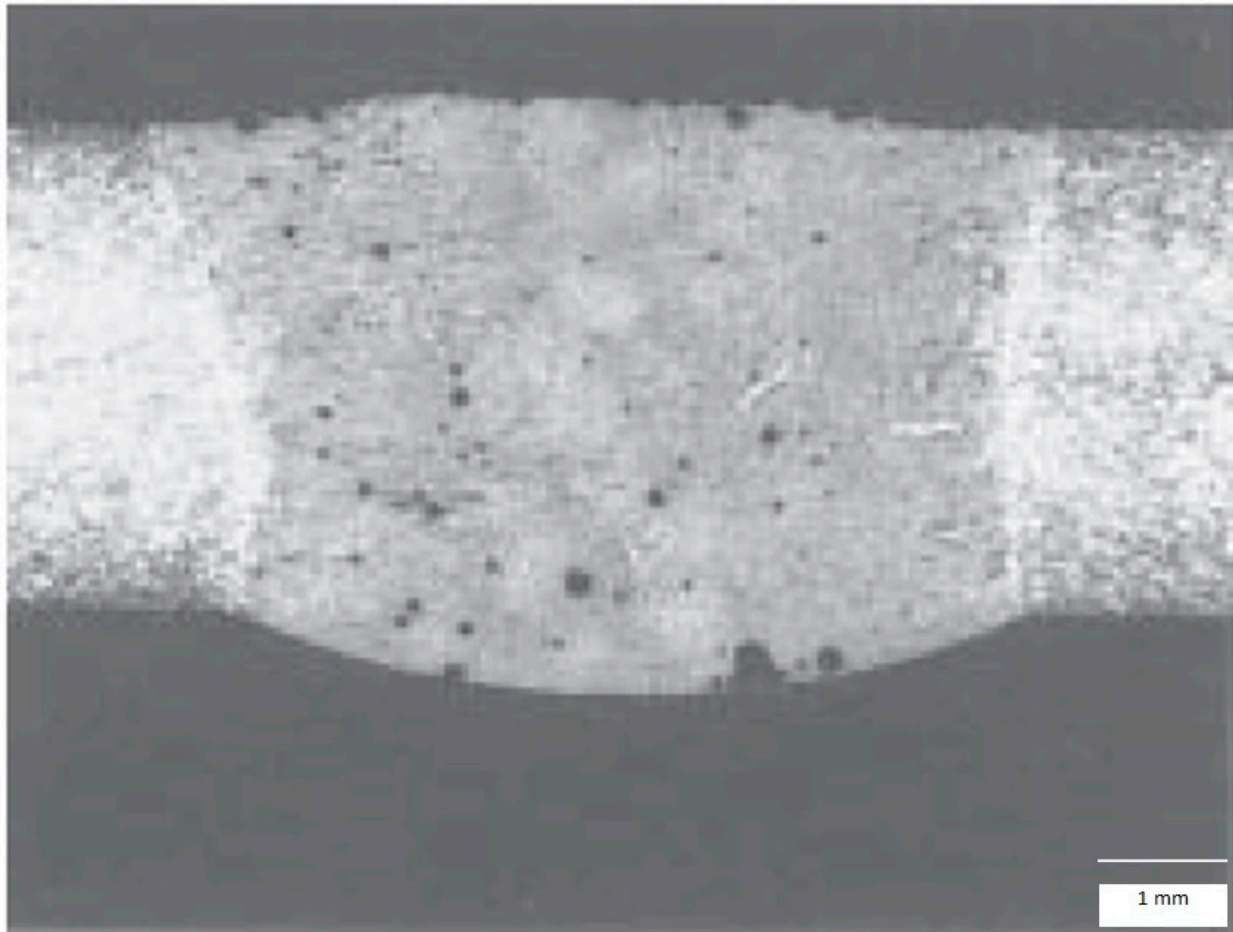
Cross-section of a laser-TIG weld bead on a 4 mm thick AlSi11Mg plate. Reproduced with permission from [87], Taylor and Francis, 2005.
